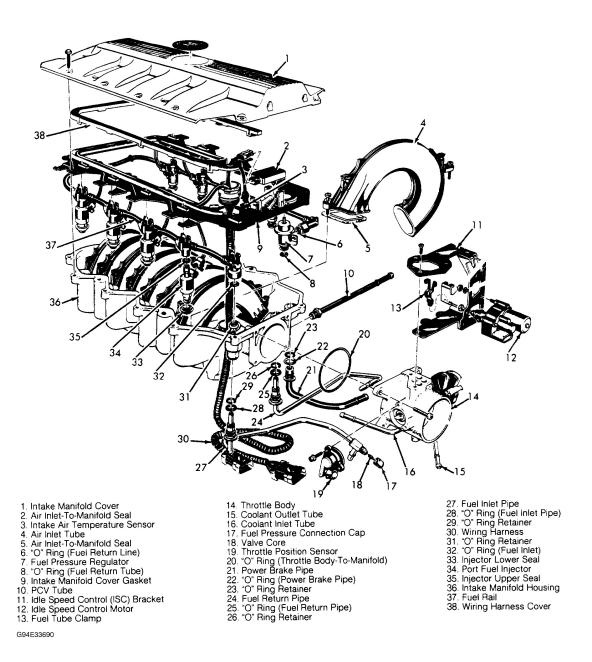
Exploded View Of Intake Manifold Courtesy of GENERAL MOTORS CORP.
